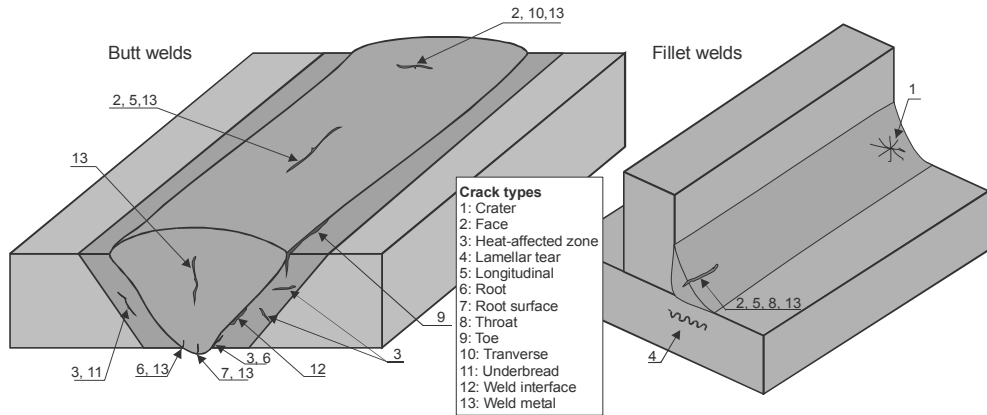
Possible cracking types occurring in susceptible zones of welded steels for butt welds and fillet welds^[HAC 17].
